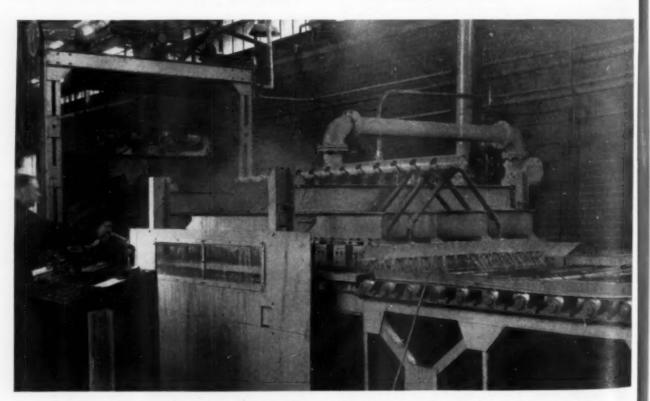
Quenching Fixture for Hardening Plate. A duplicate is used for chilling plate after the draw
